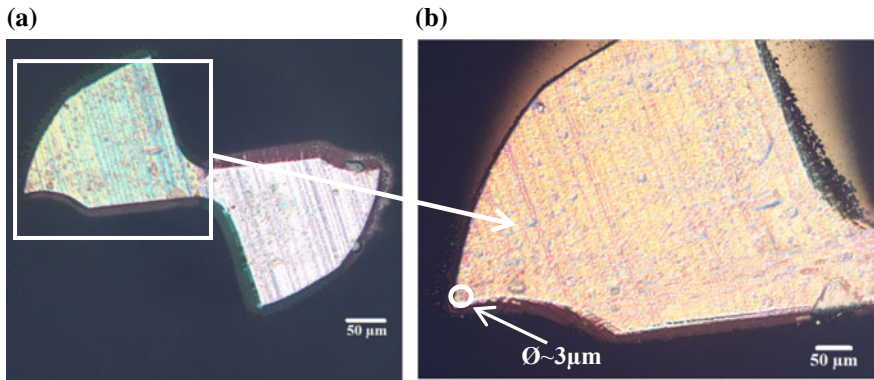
Optical images of a top view of micro-end mill cutter, b detailed view of cutting edge of the tool
